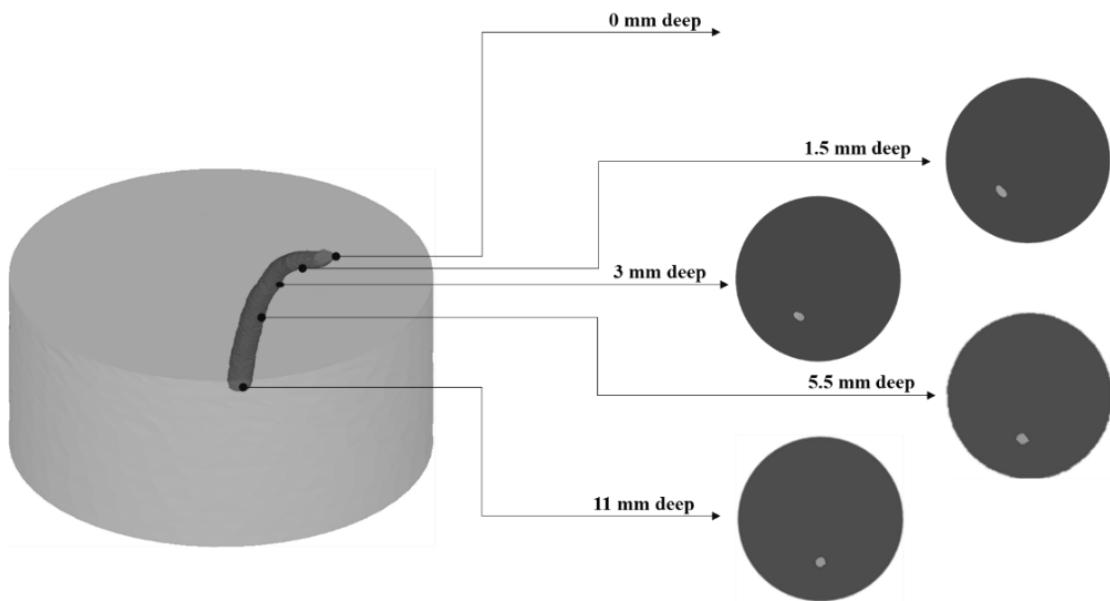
Numerical acquisition of the wire surfaces at the end of the process, for different layers.
